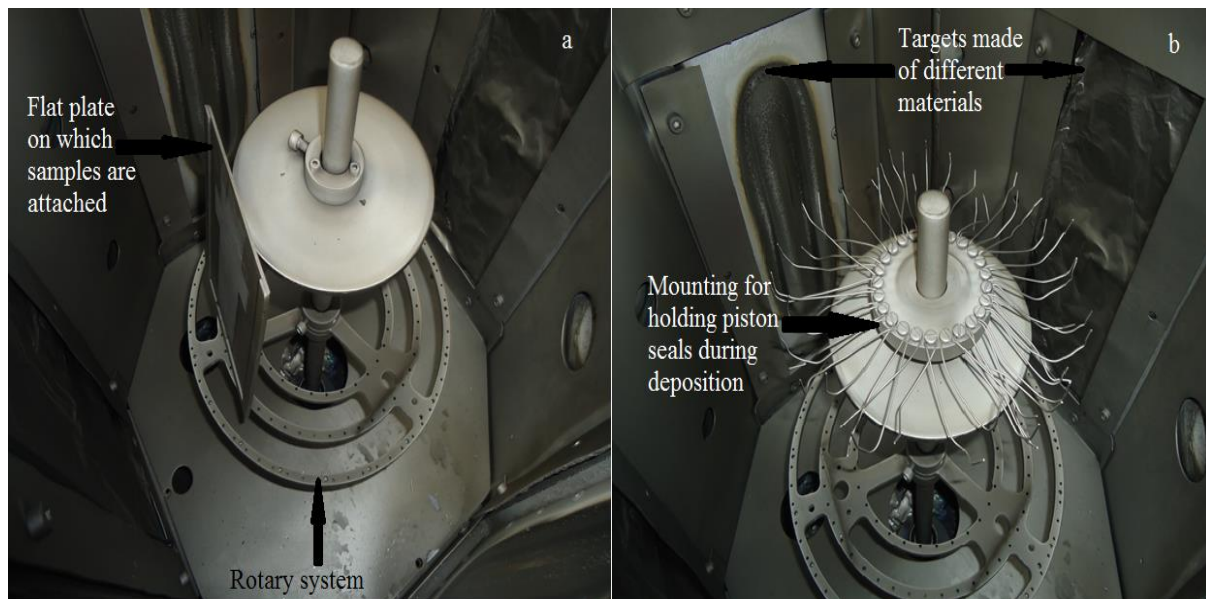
Substrate rotary table with plate on which the nitrile rubber samples were attached (a); and special mounting for holding piston seals (b) during film deposition
